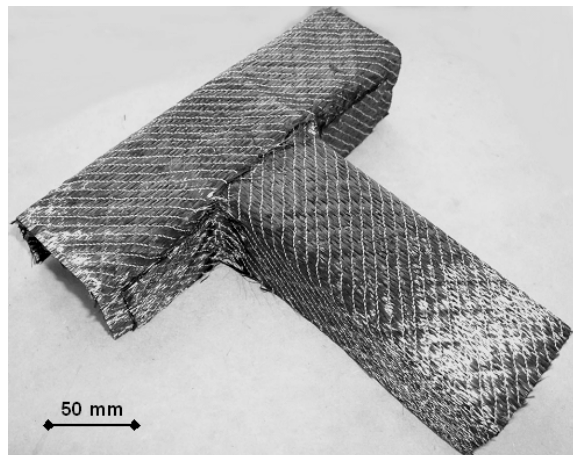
Bonding thread stitched and thermoformed specimen (dry preform)
